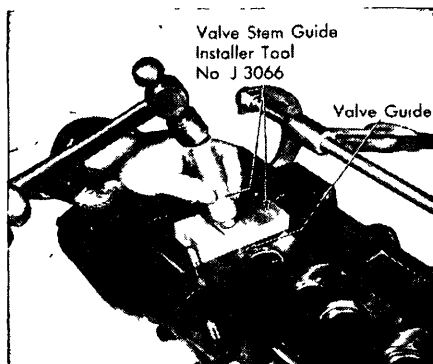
Showing special tool used to control position of valve guides when driven into 1949-52 engines
